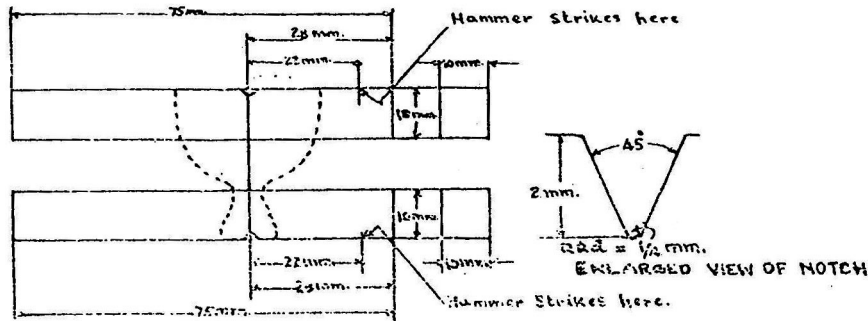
Specimens 4a and 4b. Izod impact test pieces.
